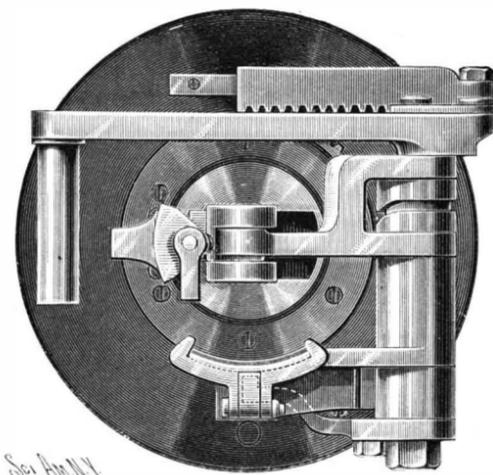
MODIFICATION—HANDLE AND WIPER COMBINED. CAN BE USED TO WORK EXTRACTOR.
